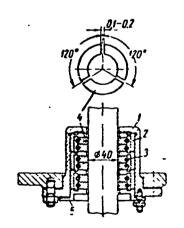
Gas gland: 1) housing; 2) cup; 3) spring; 1:) packing ring; 5) flange.
